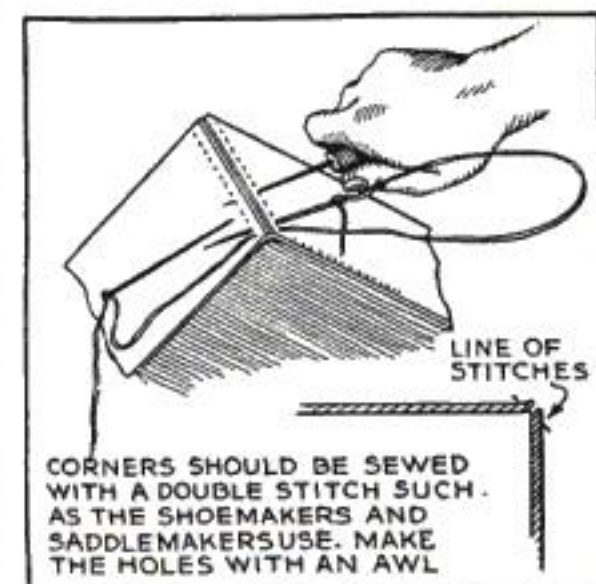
The linen thread used for the stitching should be well coated with shoemaker's wax.
